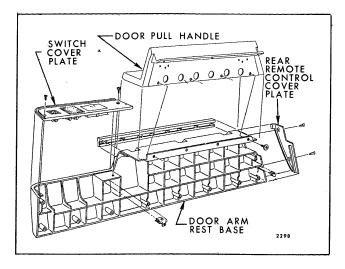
Door Arm Rest and Pull Handle - 49487 Style with Custom Trim
